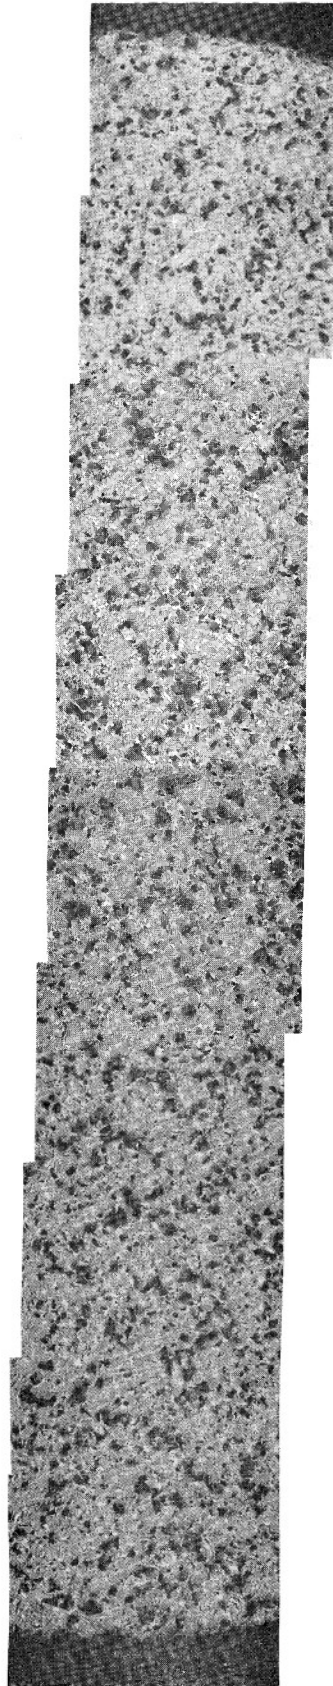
Flick Inspection Results and 10X Black and White Photographs of Fracture Faces of Highest Open Porosity Specimen S2-2, ATJ-S Billet L-16-7
